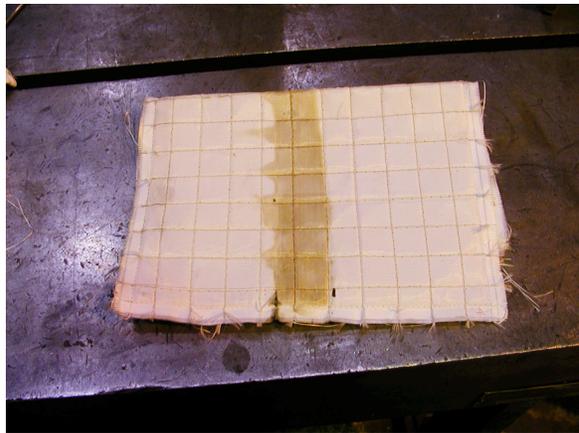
Microtherm insulation after the weld discolored but unharmed
